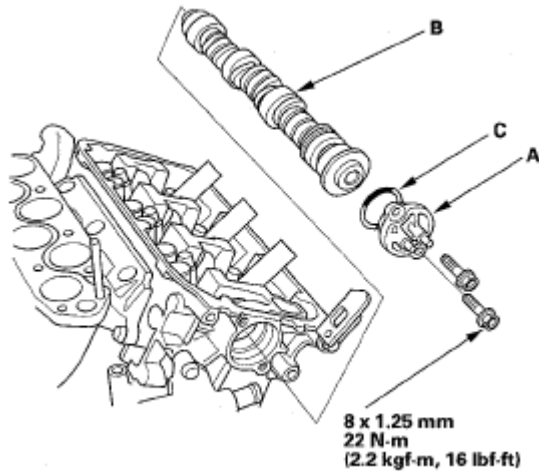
Identifying Thrust Cover And Rear Camshaft
